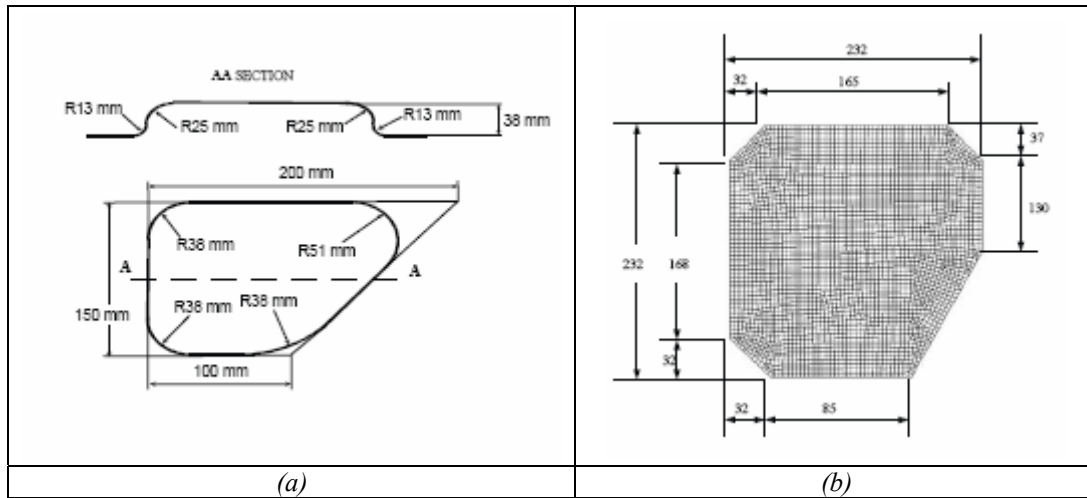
Part and blank geometries used in both simulations and experiments: (a) part geometry; (b) blank geometry (dimensions are in “mm”).
